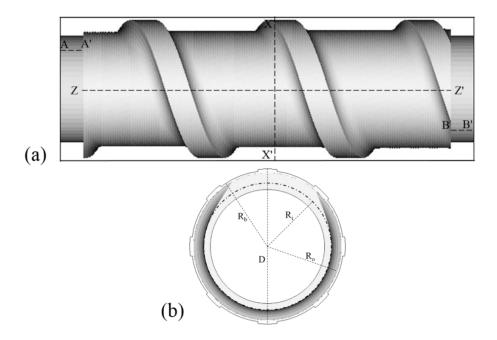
Geometrical dimensions of the screws and the barrel. (a) Top view, (b) Front view
